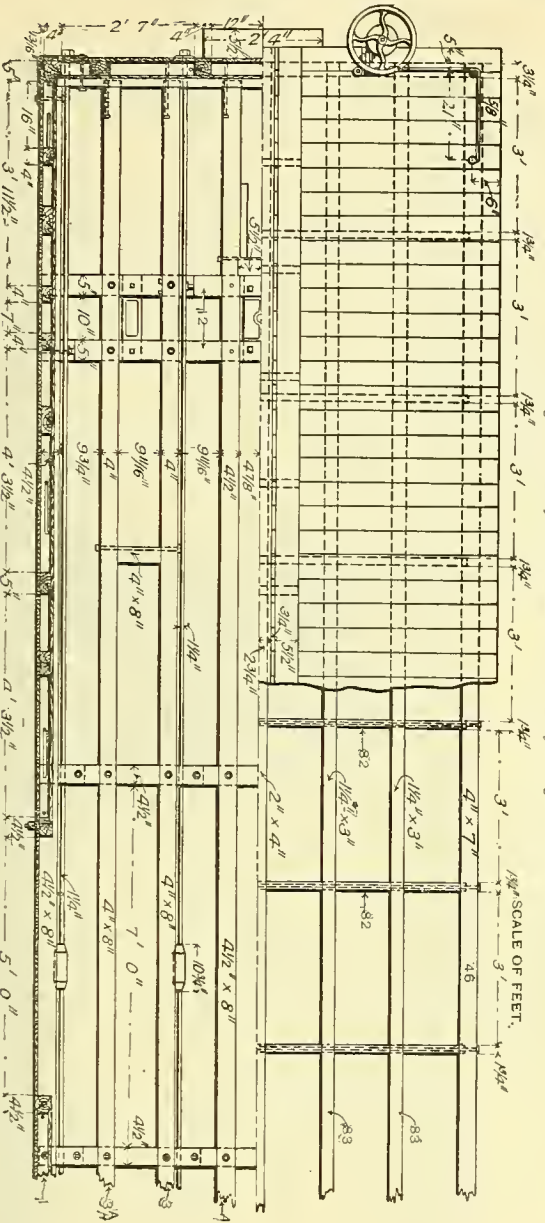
Half Longitudinal Section and Half Side Elevation.
